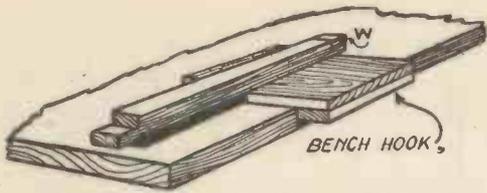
The Rail held on Bench Hook to Saw Tenon Shoulder.
